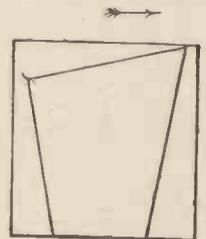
Front view of a turning tool showing the side slope or rake which gives a cutting angle towards the direction of feed.
